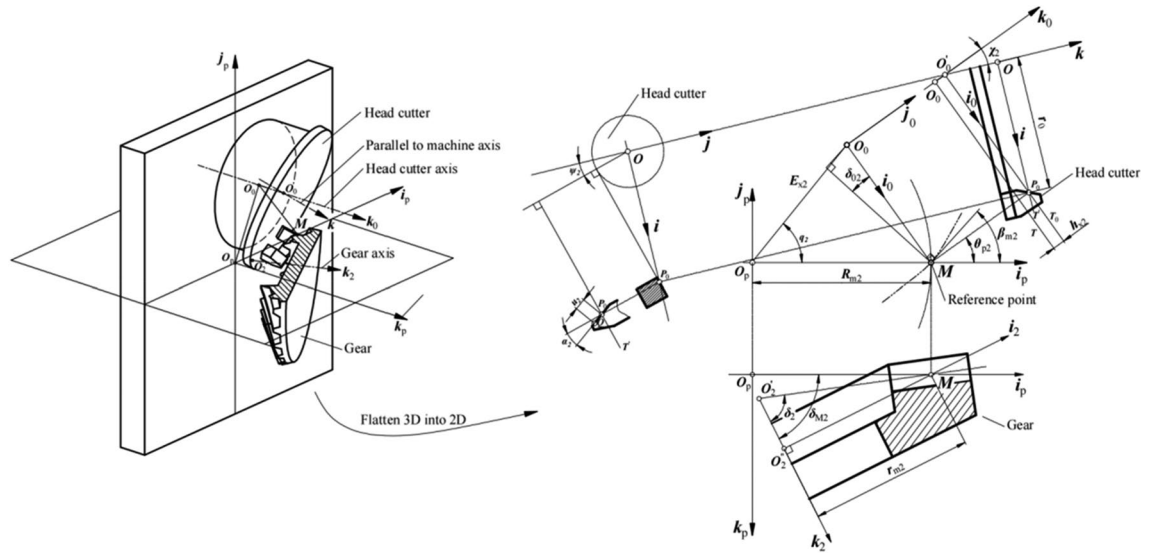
Relative position between the head cutter and the gear with the right-hand teeth.
